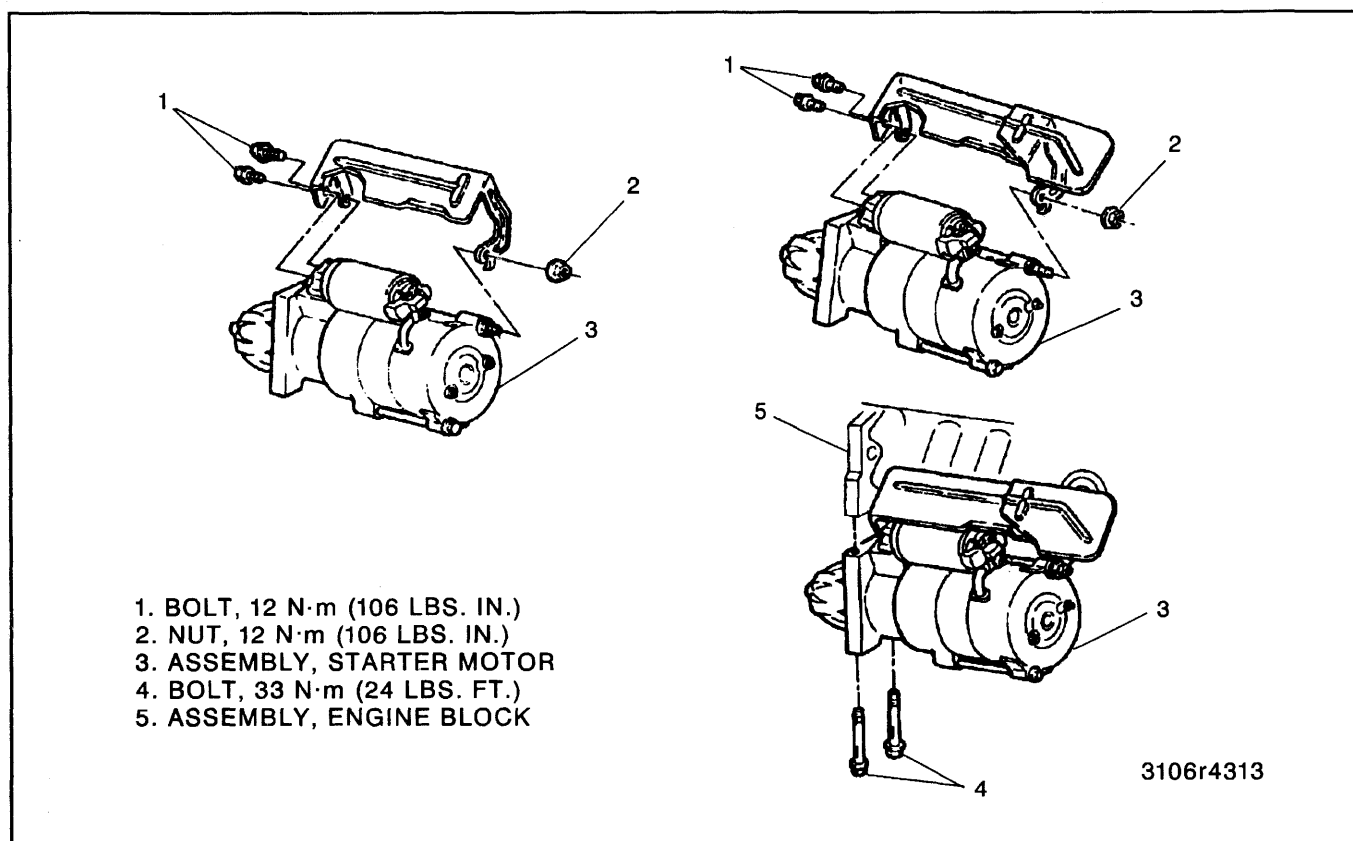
Gas Engine Starter Motors (5.7, 7.4L - Late Production)
